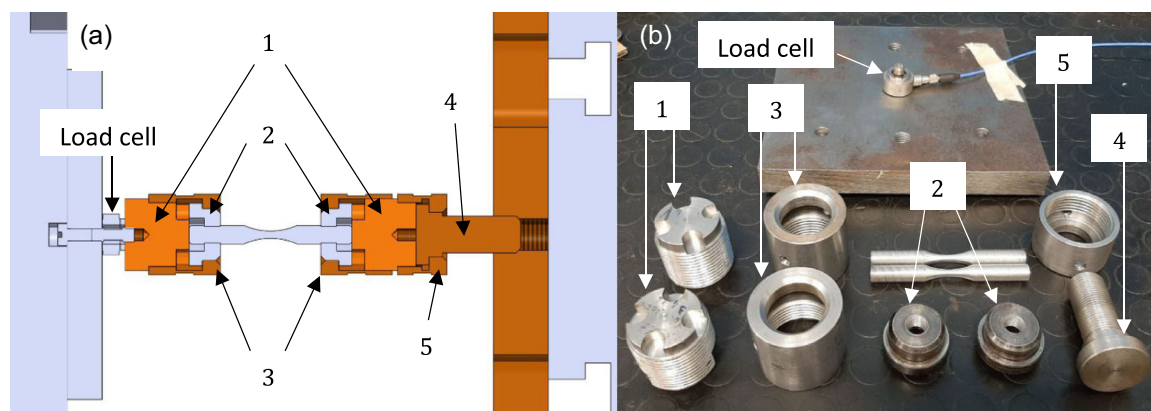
Assembly section (a) and picture (b) of the equipment used for the random tests.
